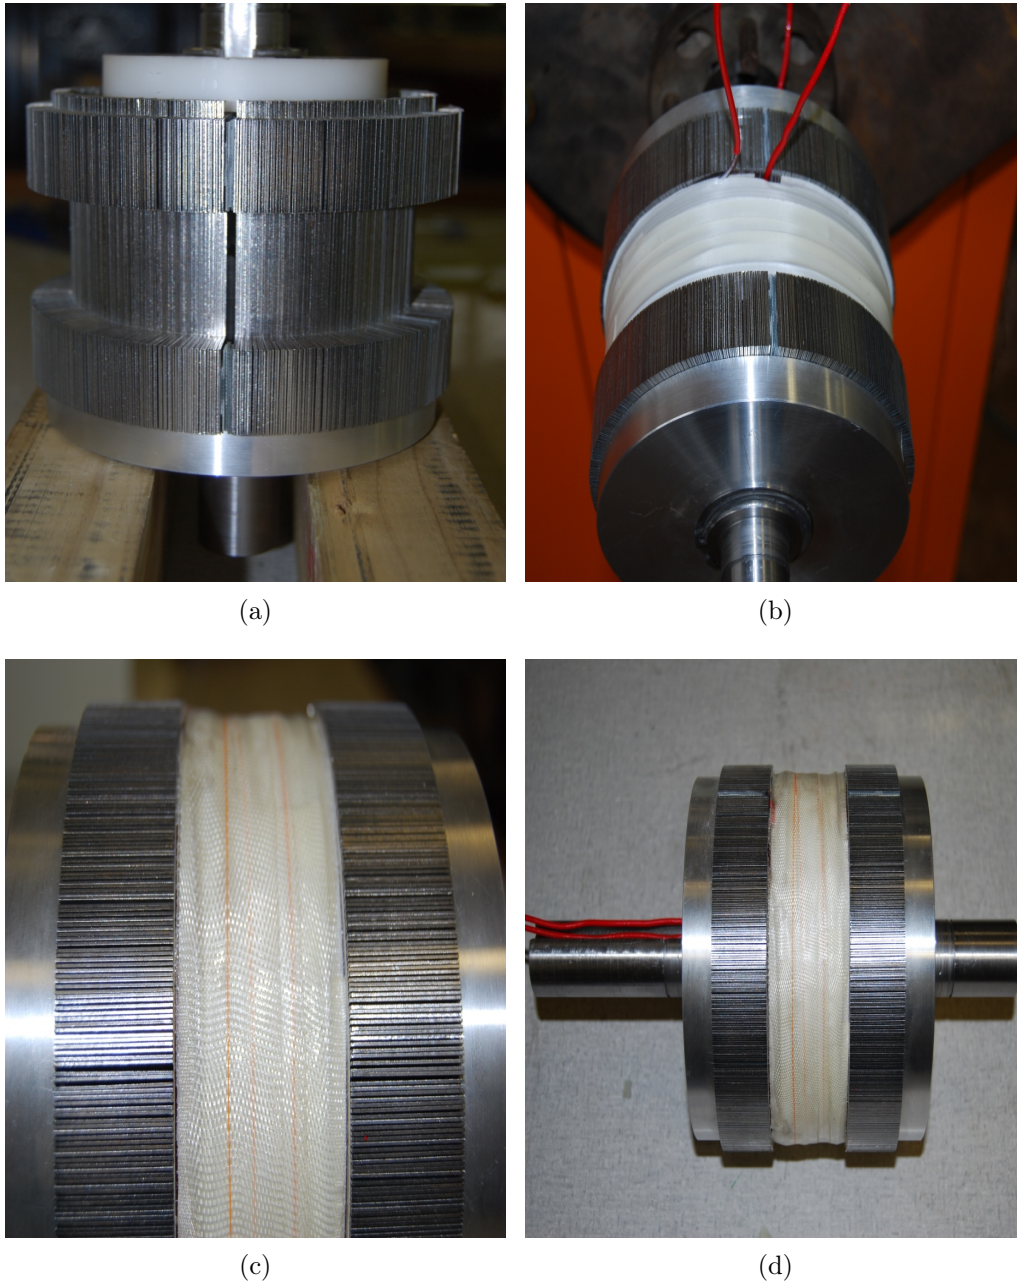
Secondary side winding: (a) Gap for end of secondary coil, (b) Completion of winding with insulating tape. (c) Close up of winding, (d) Final secondary side assembly.
